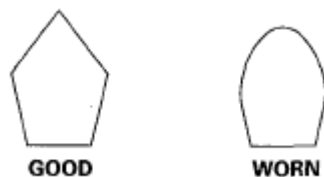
Identifying Example Of Synchro Sleeve Teeth And Gear Teeth
